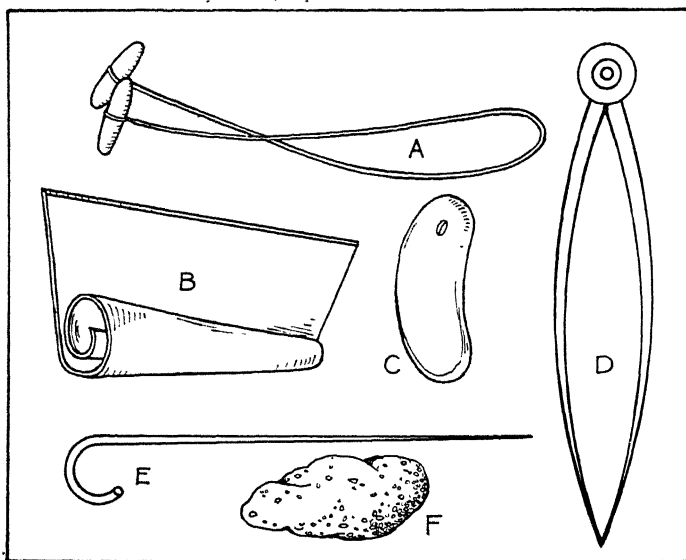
Tools used in throwing. *A*, cutting-off wire; *B*, outside rib; *C*, inside rib; *D*, calipers; *E*, piercing tool; *F*, sponge.
